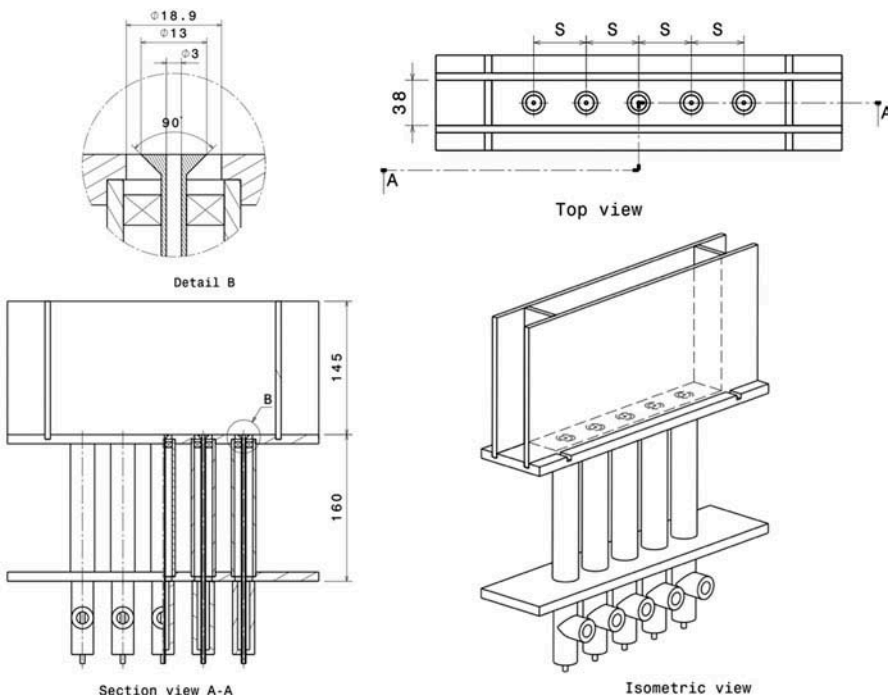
Drawing of the linear non-premixed combustor for an inter-burner spacing $S = S_{12}$. The dimensions are in mm.
